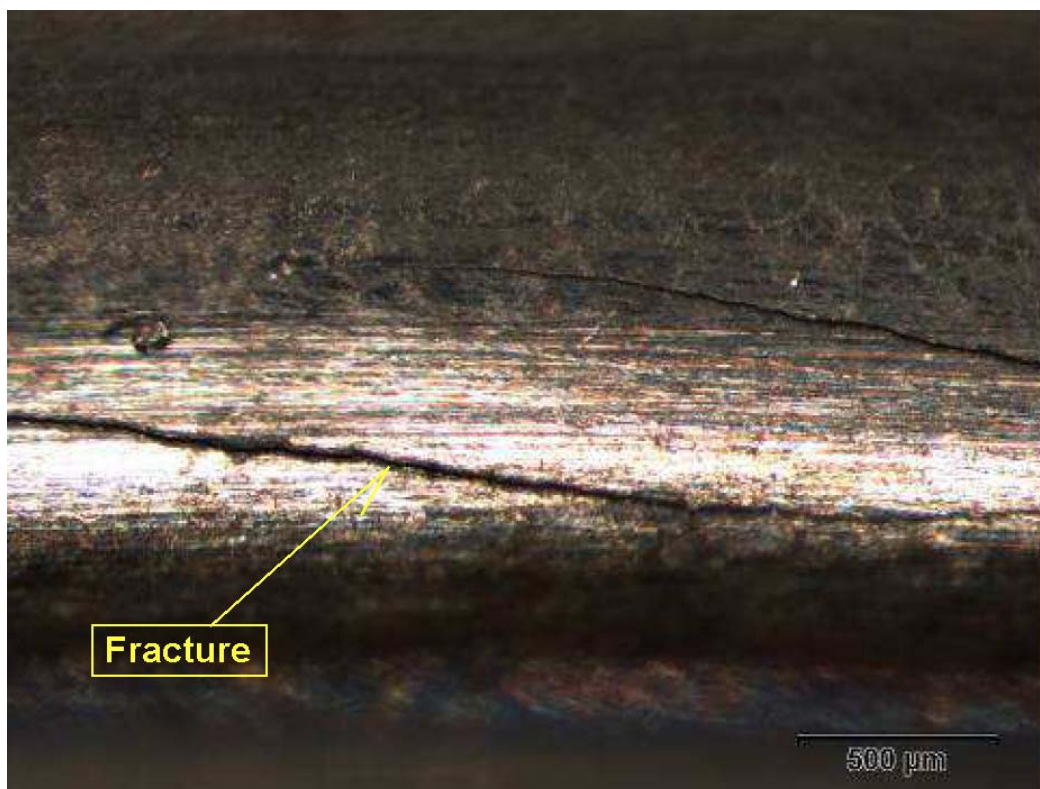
Scratches on crankshaft surface around fracture located at bearing 2
